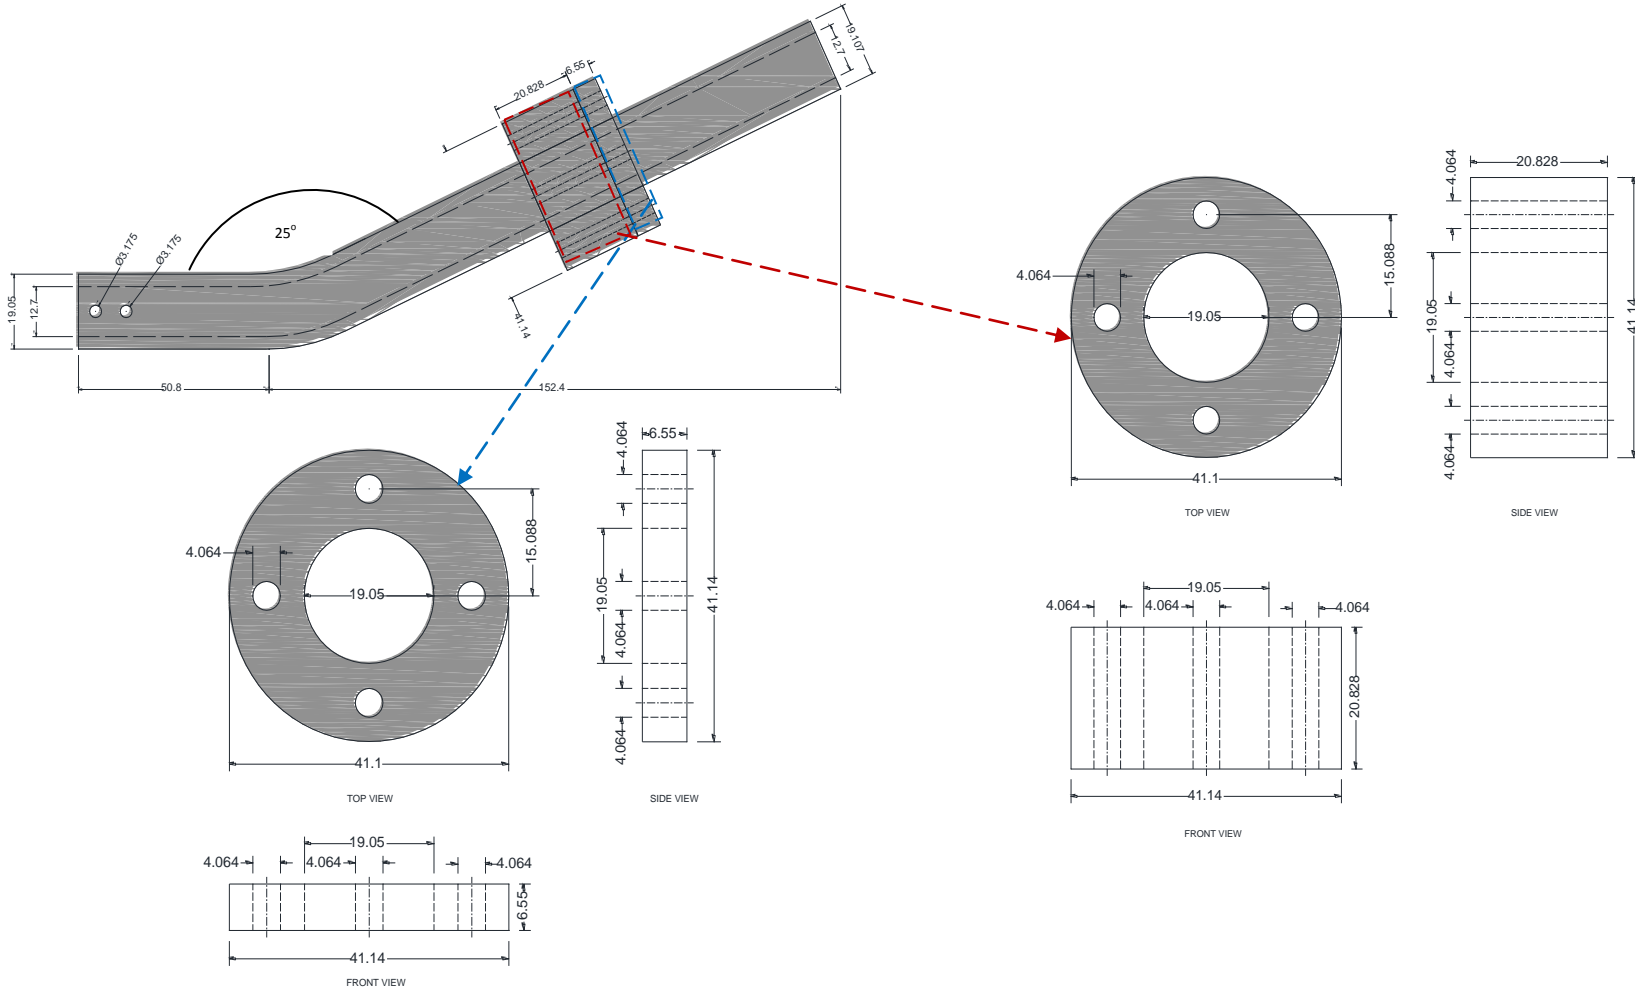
Detailed Sketch of the Stainless Hollow Tube
